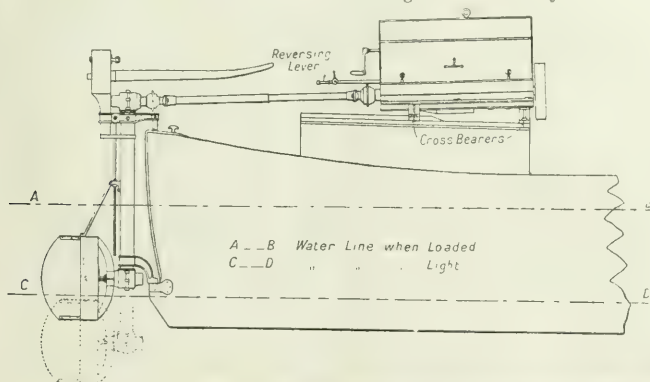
STERN OF BARGE SHOWING DETACHABLE MOTOR INSTALLATION.
